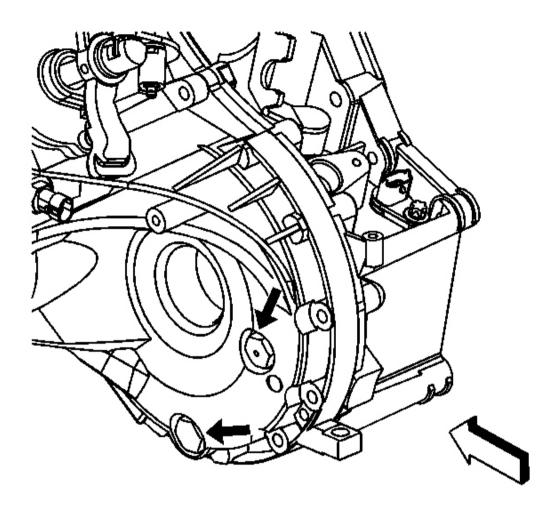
Transaxle Mount Courtesy of GENERAL MOTORS CORP.
